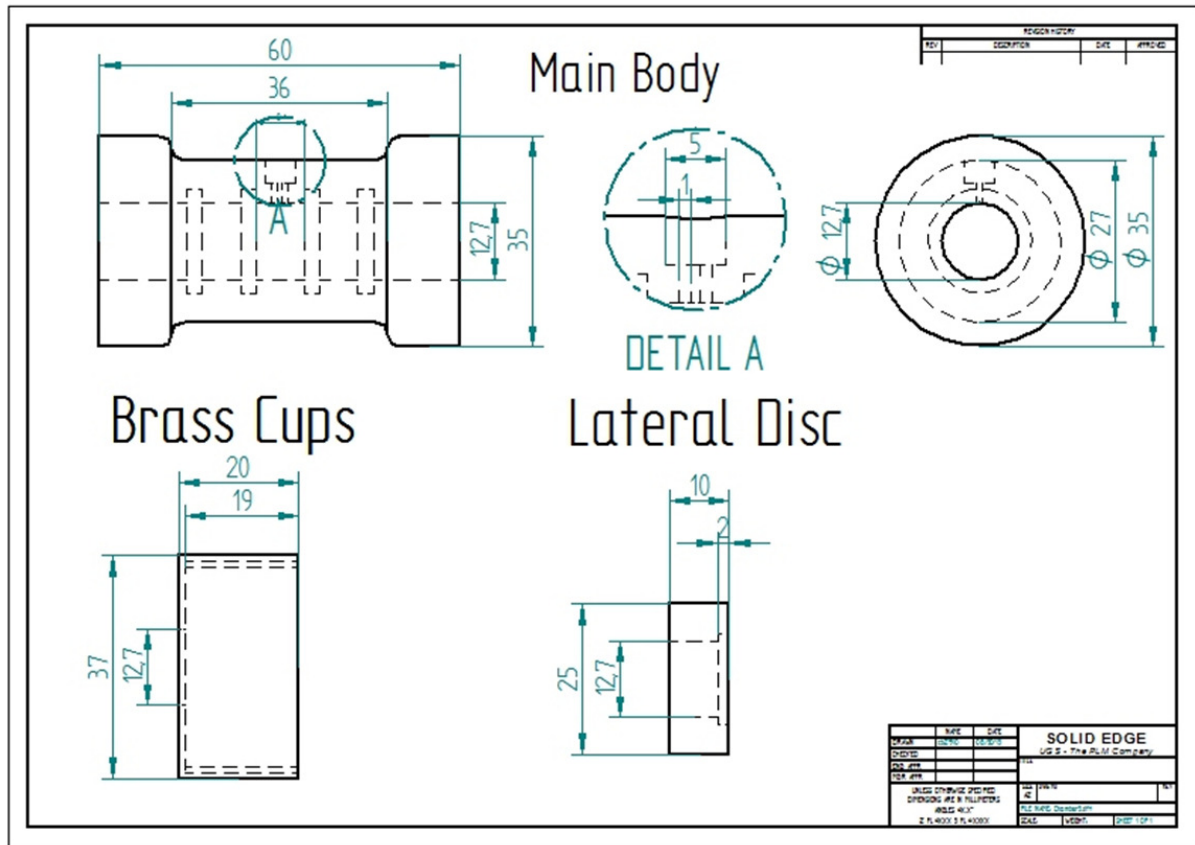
Confinement Chamber 3. The chamber is composed of three parts: a main body in polycarbonate (center object) with bore holes where liquid is inserted using a syringe; two polycarbonate discs with O-ring seals; and two brass screw caps that hold the components together and align the chamber on the bars.
